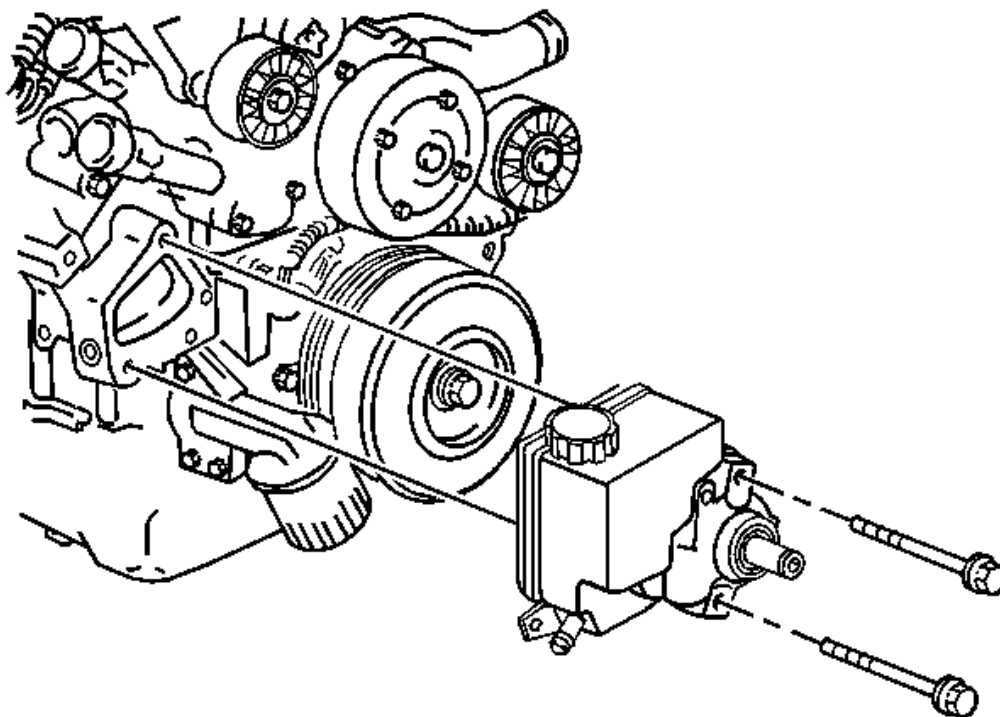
View Of Power Steering Pump And Mounting Bolts
